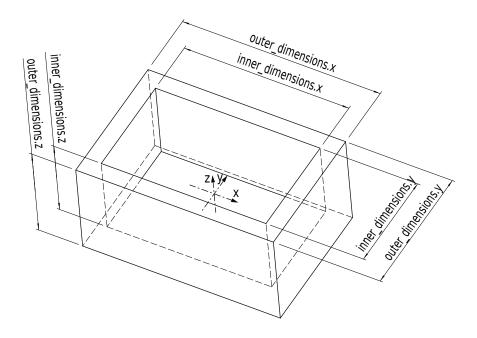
Load carrier with reference frame and inner and outer dimensions
